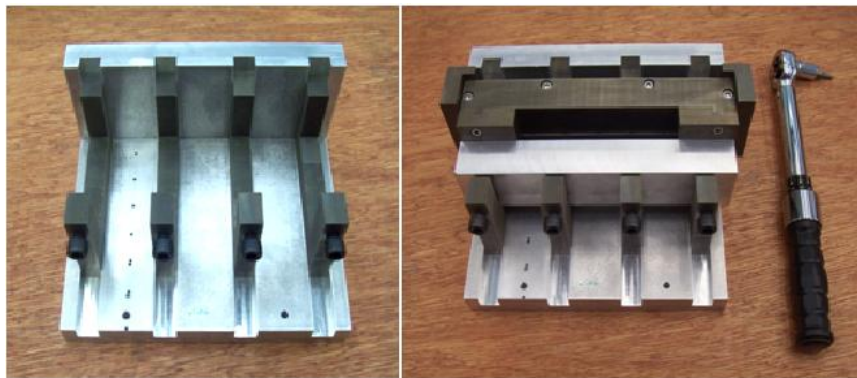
Torque Fixture. This figure show the torque fixture (Left) and the torque fixture holding the alignment and epoxy curing fixture with the torque wrench resting next to it (Right).
